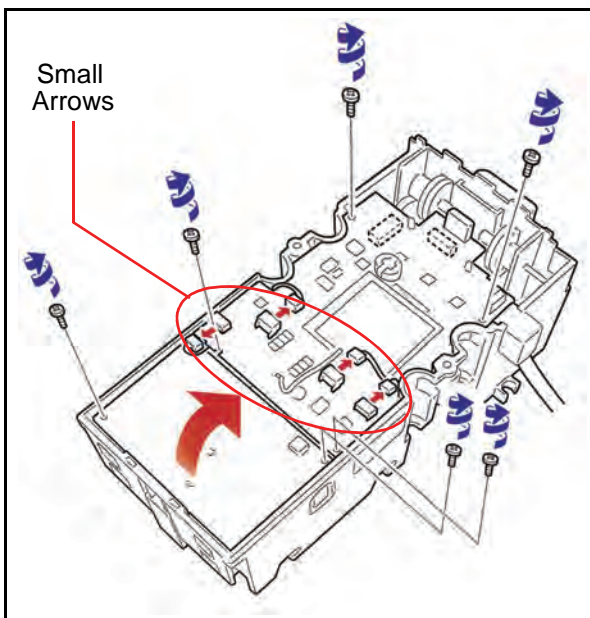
Screw and Connector Removal and Circuit Board Access
